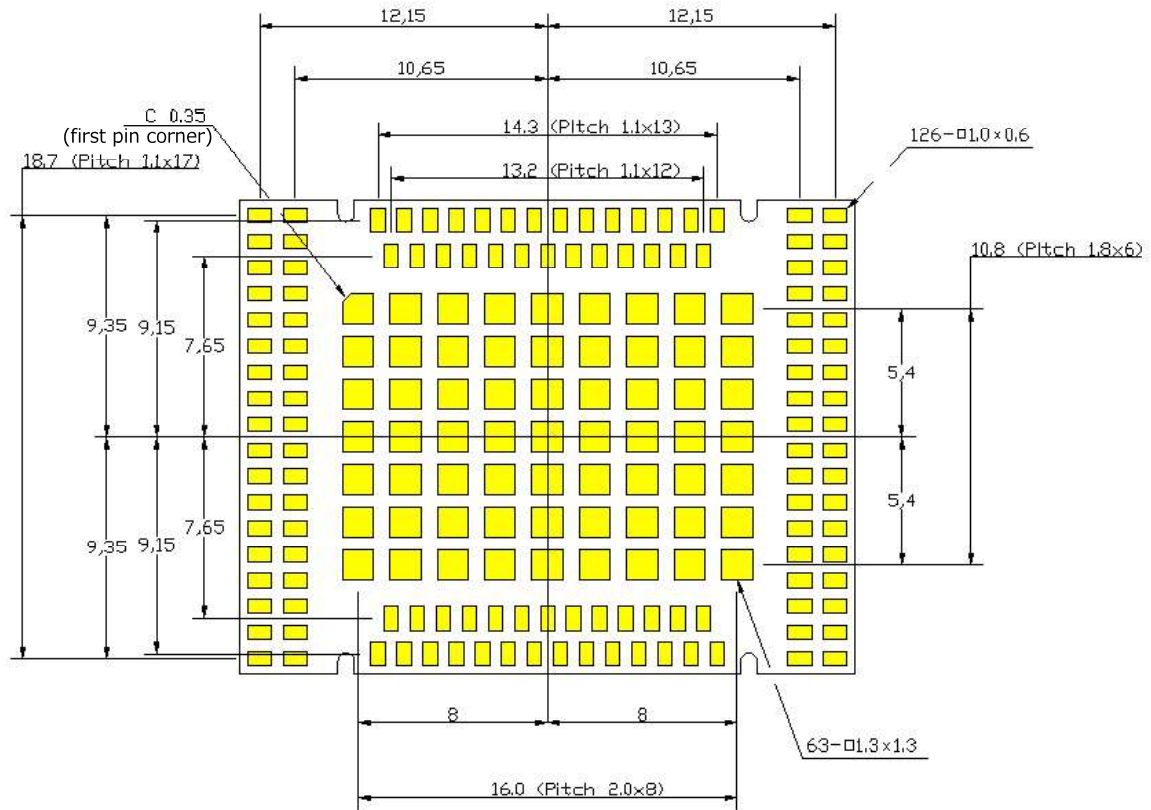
Dimensions of the module (TOP THRU VIEW) (unit: mm)
